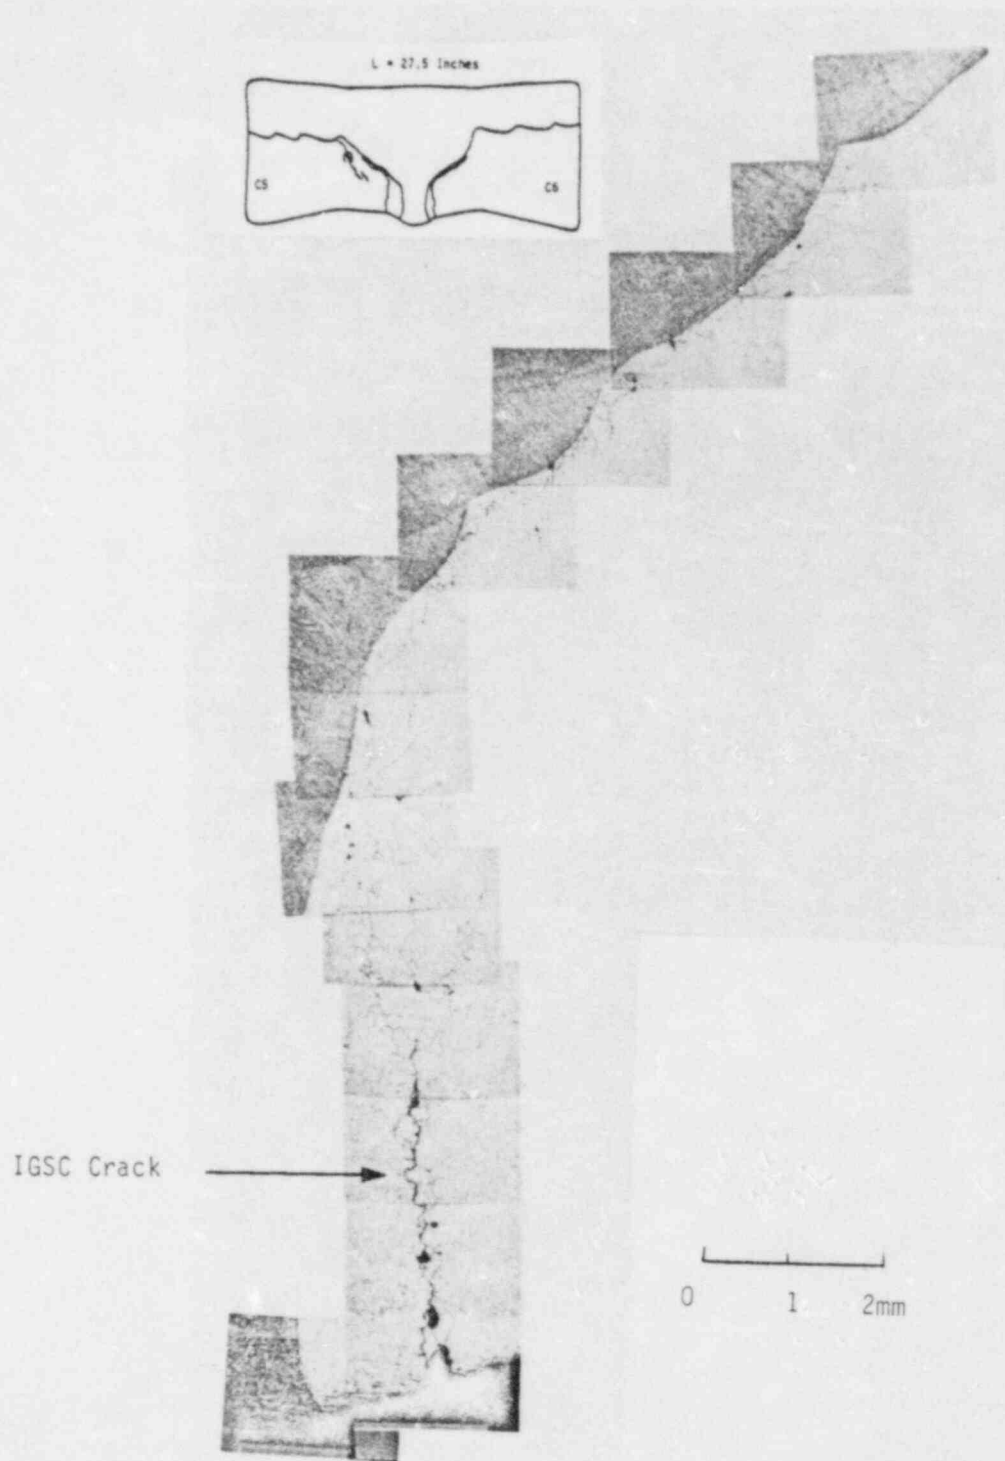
Cross Section of C6 Side of NC5-C6 at 27.5 Inches, Indicating a Through-Wall Depth of 82% of the Original Pipe Wall. (Crack Depth = 0.647 Inch; Total Remaining Wall = 0.462 Inch.) Source: Becker et al., EPRI NDE Center, April 1985.
